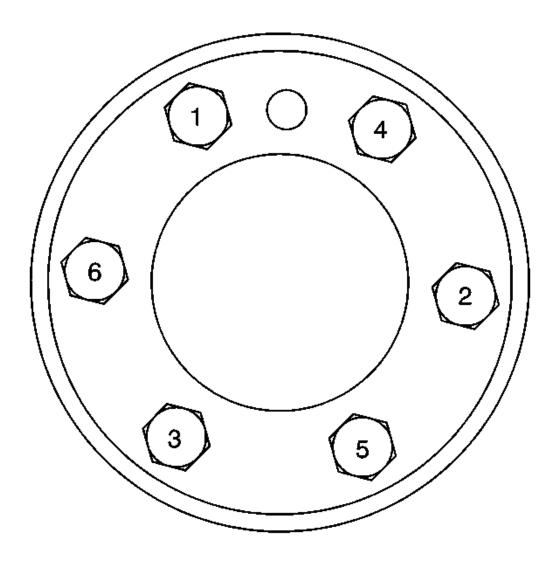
Identifying Flywheel Bolt Tightening Sequence
